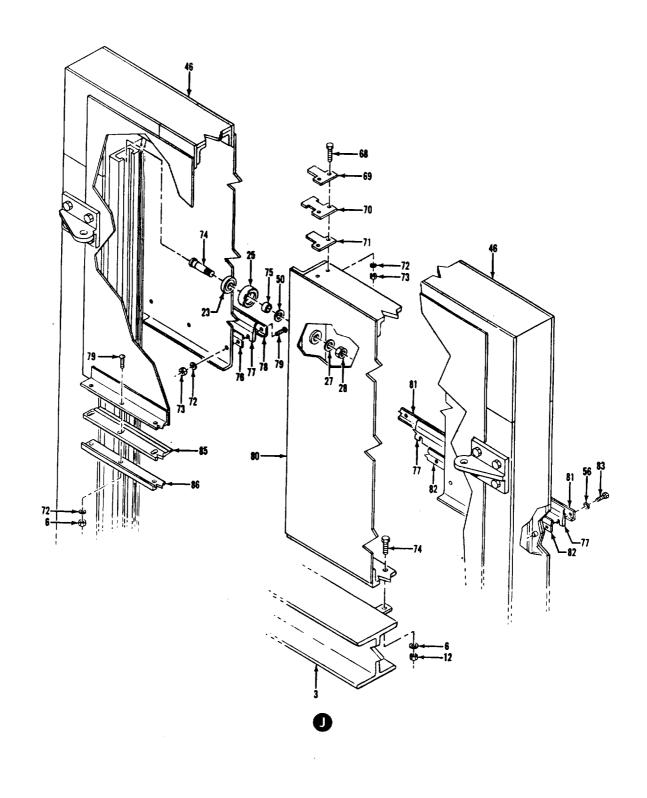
Extension Platform Assembly (Sheet 7 of 13)
